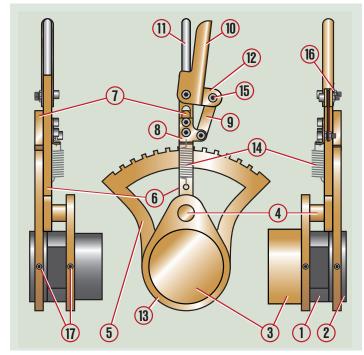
, Johnson bar assembly (slightly undersized). 1 — rotating hub (with steering wheel removed); 2 — fixed hub (molded as part of the front case); 3 — cap; 4 — connector rod; 5 — quadrant; 6 — Johnson bar arm; 7 — slide; 8 — extension; 9 — link; 10 — handle grip; 11 - Johnson bar handle; 12 — grip extension; 13 — yoke; 14 — tension spring (McMaster Carr Part No. 9654K941); 15 — four o-80 x .25-inch socket head cap screws (trim to suit); 16 — four o-80 x .125-inch hex nuts; 17 — six o-80 x .125-inch cup point set screws (some pointers omitted for clarity).
